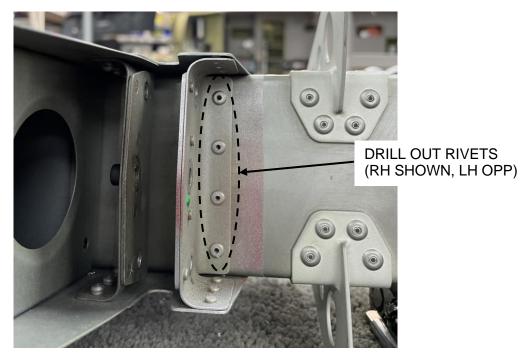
RIVETS IN INBOARD HINGE BRACKET ASSEMBLIES
